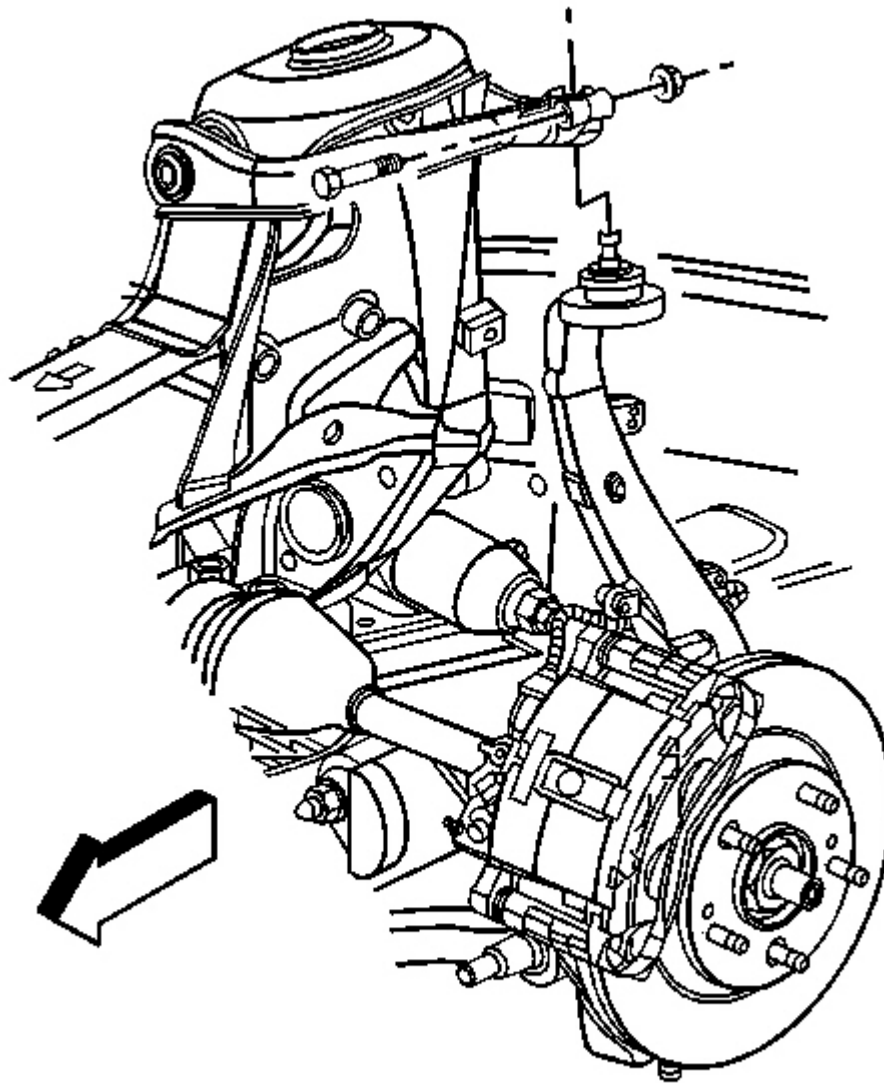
View Of Upper Control Arm To Steering Knuckle Pinch Bolt & Nut
